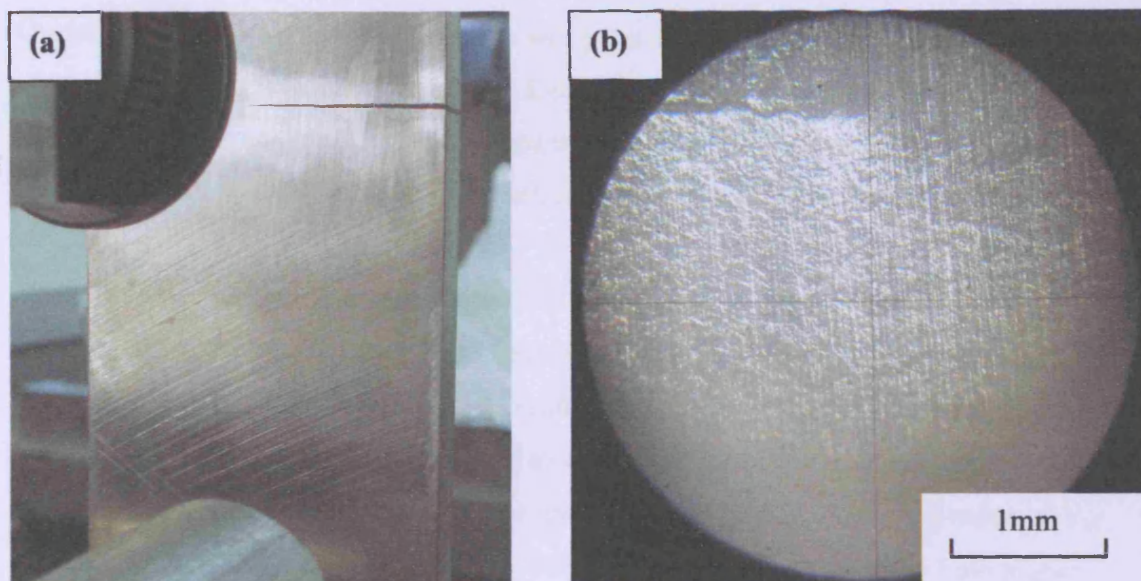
(a) A complete fatigue Test 6 specimen, and (b) crack 2 tip as seen through a microscope ($a_2 \approx 42\text{mm}$)
